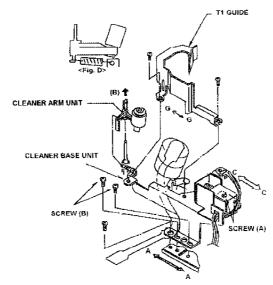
Cleaner Solenoid Position Adjustment (1)
